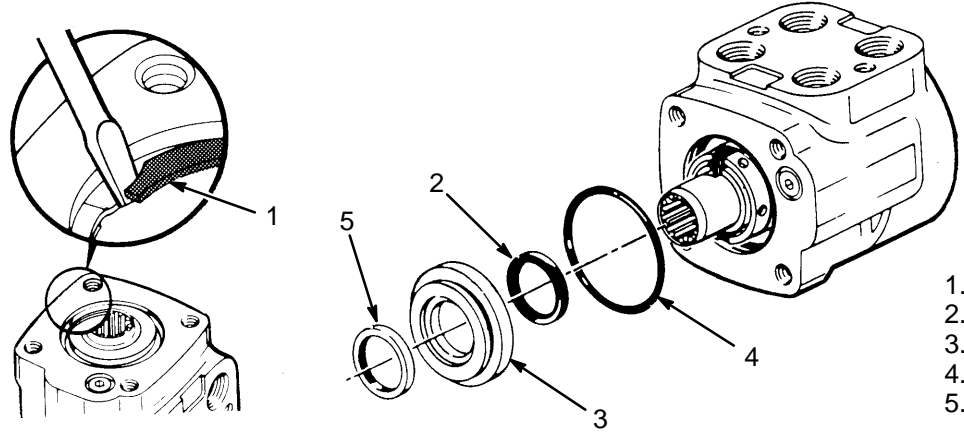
DISASSEMBLY OF THE STEERING CONTROL UNIT (1 of 2)
